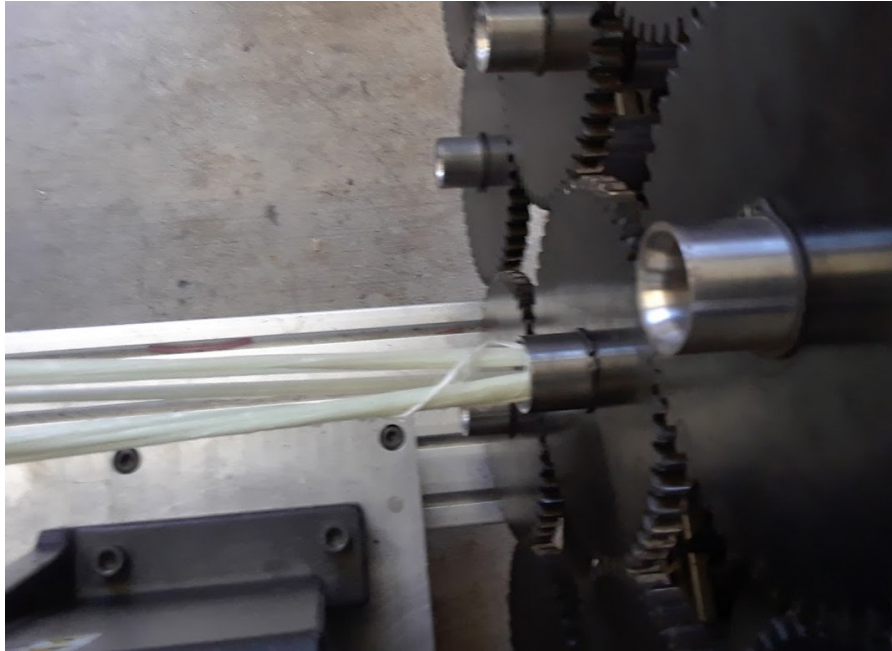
Close-Up View of Prepreg Tows Coming through Shaft in Center of Horn Gear
